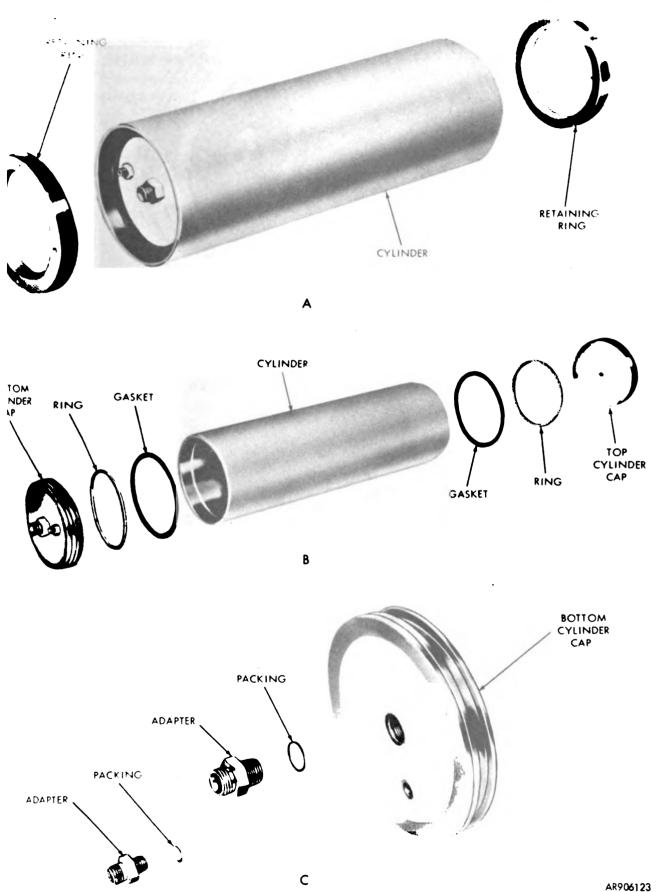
Hydraulic (main) accumulator disassembly or assembly of assembly Digitized by
